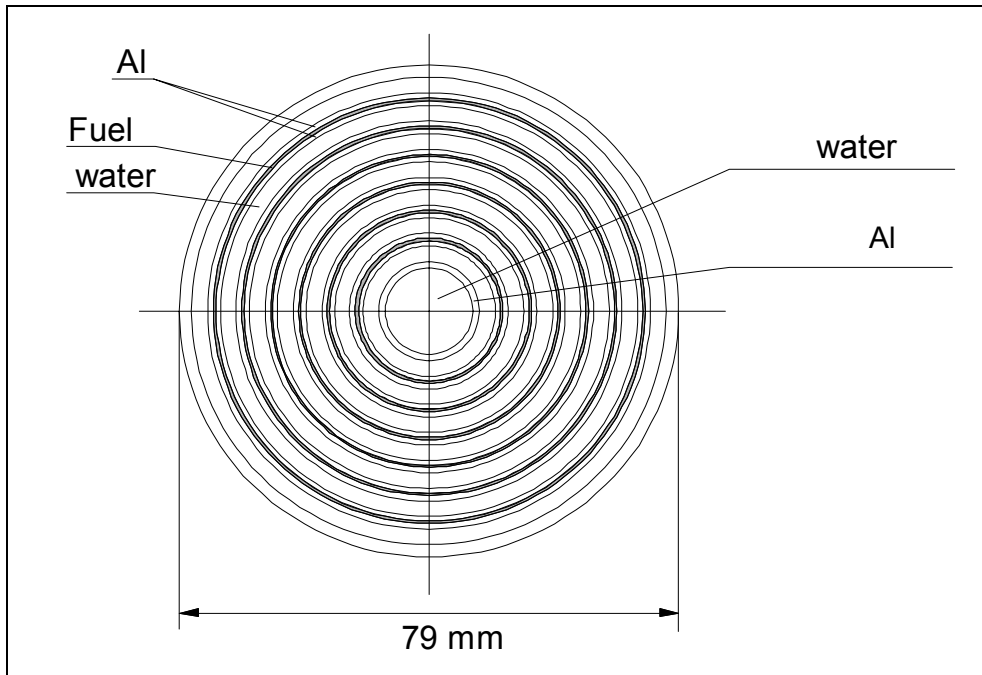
Geometry of benchmark b horizontal cross section of the fuel assembly.
